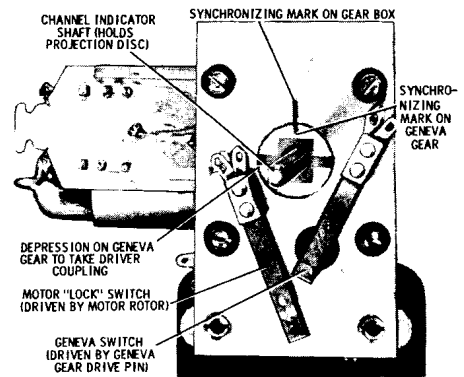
SYNCHRONIZING MOTOR GEAR BOX WITH TUNER
